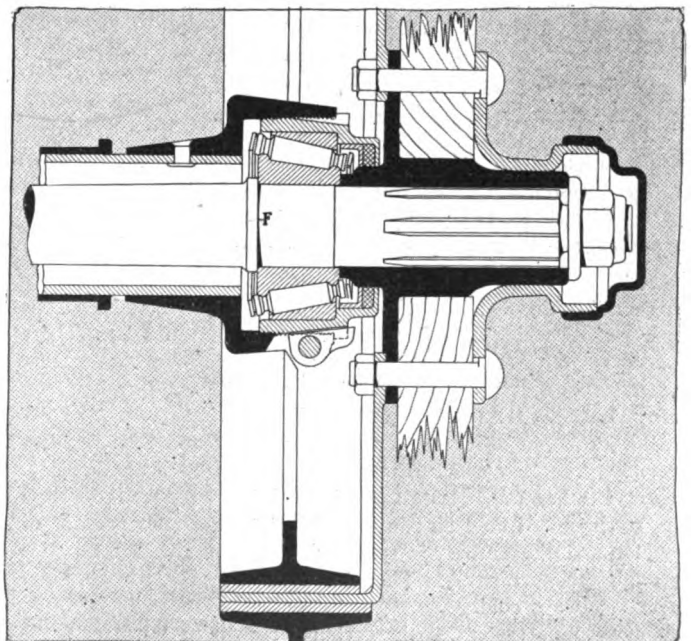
Section of Pierce rear wheel, showing roller-carried hub
